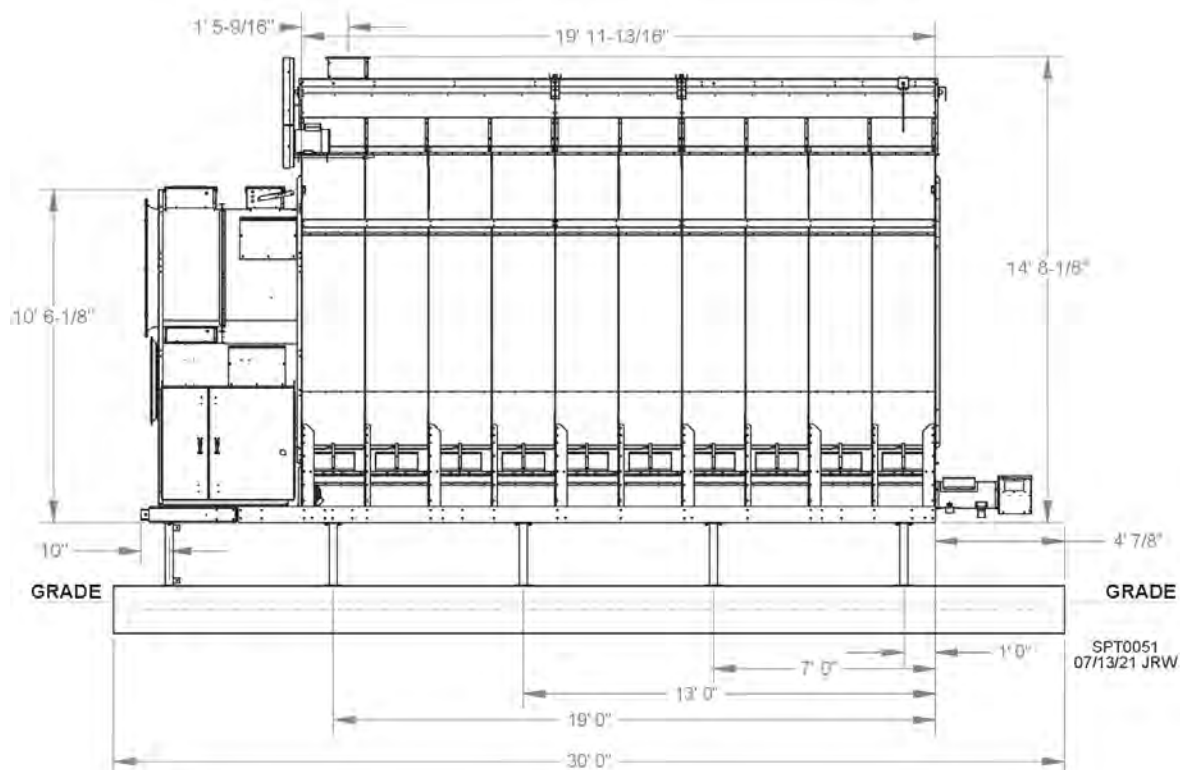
Leg locations & dimensions for 20' axial dryer
